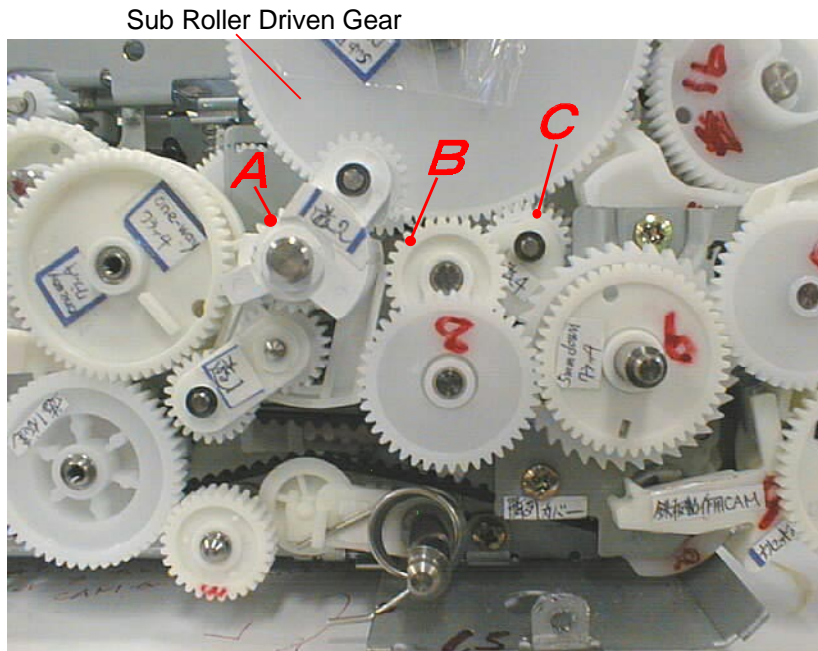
Conveying Motive Power in the Sub Roller Gear Train
